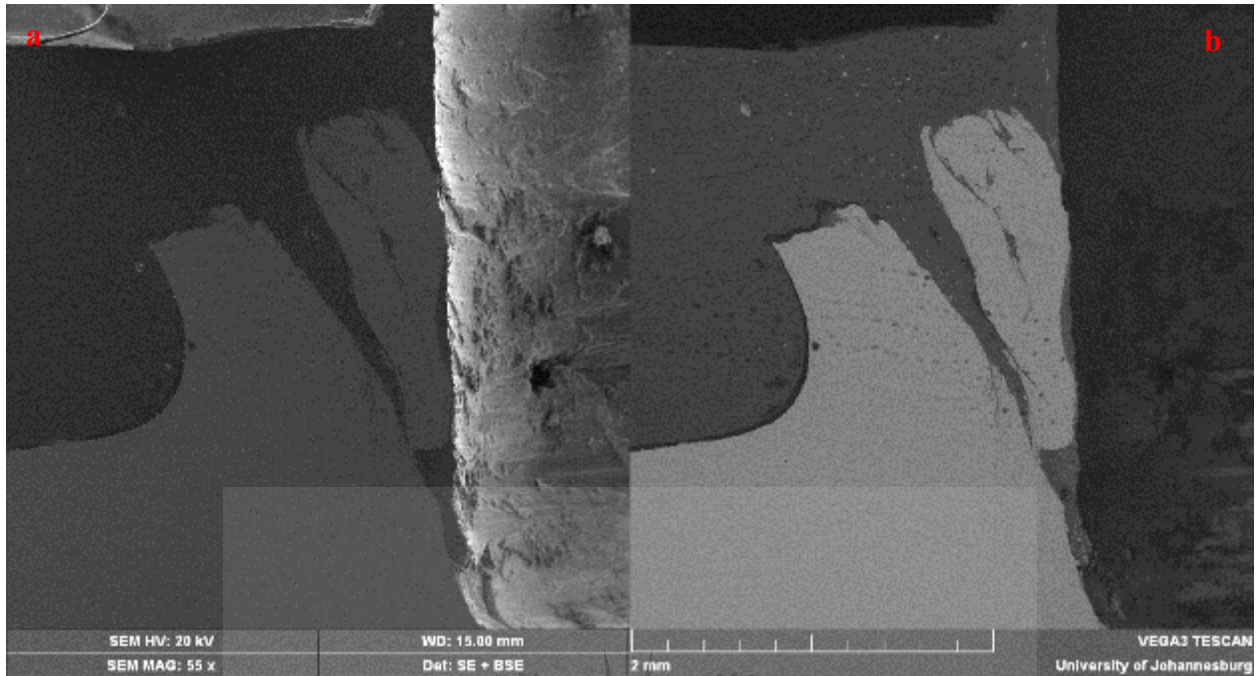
Showing a secondary electron (a) and a backscattered electron (b) images of the spot weld produced at 1200 rpm and 0.5 mm plunge depth using a flat pin and a flat shoulder tool
